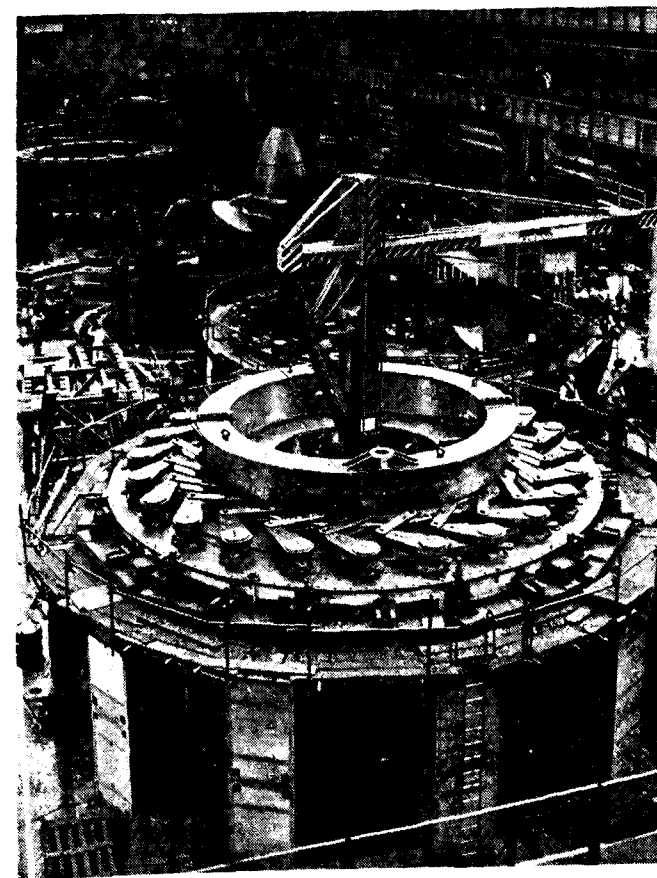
Assembly of turbine stationary parts for Priest Rapids and general view of the English Electric assembly bay.
